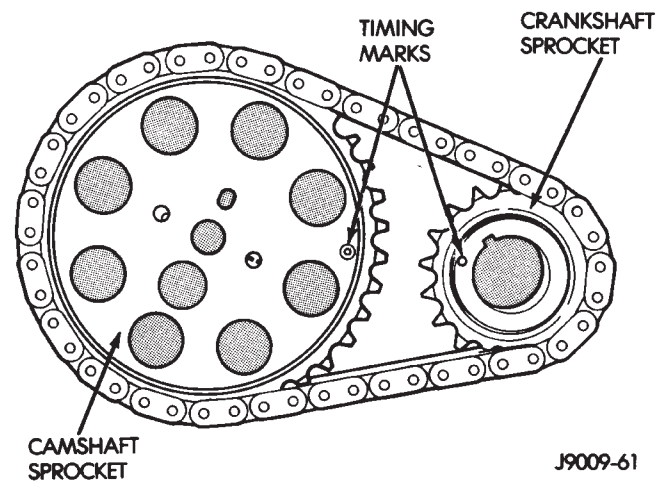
Crankshaft—Camshaft Alignment—Typical
